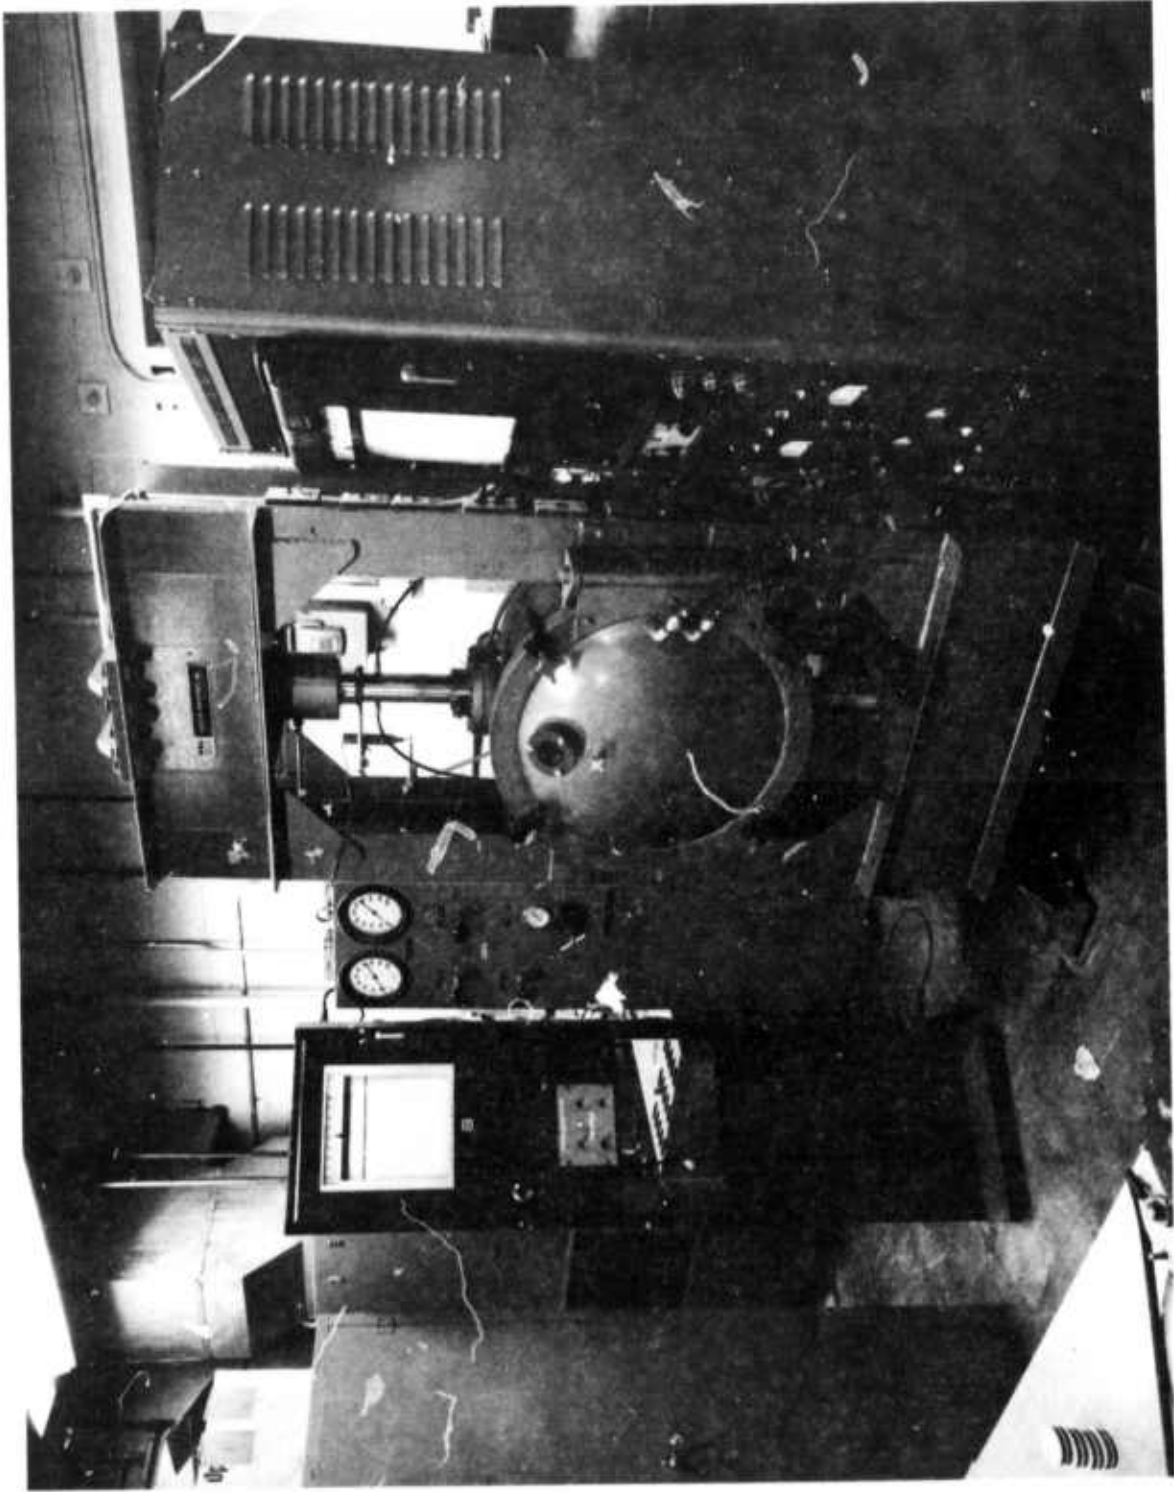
50-Ton Vacuum Hot Press Used for Casting and Hot Forging Polycrystalline Alkaline Earth Fluorides.
